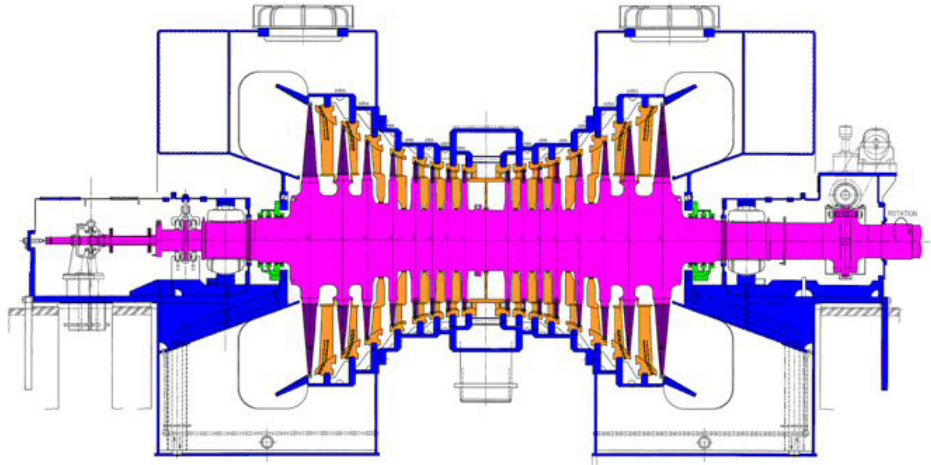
Turbine Sectional Assembly of Darajat Unit #2 & 3.
